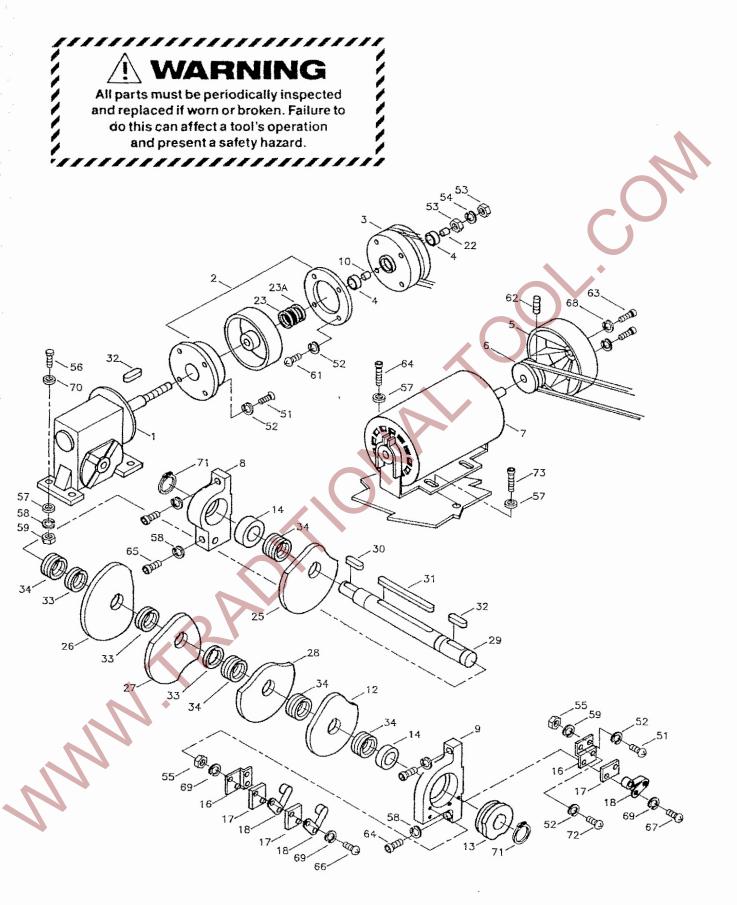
DRIVE AND CAM ASSEMBLIES
